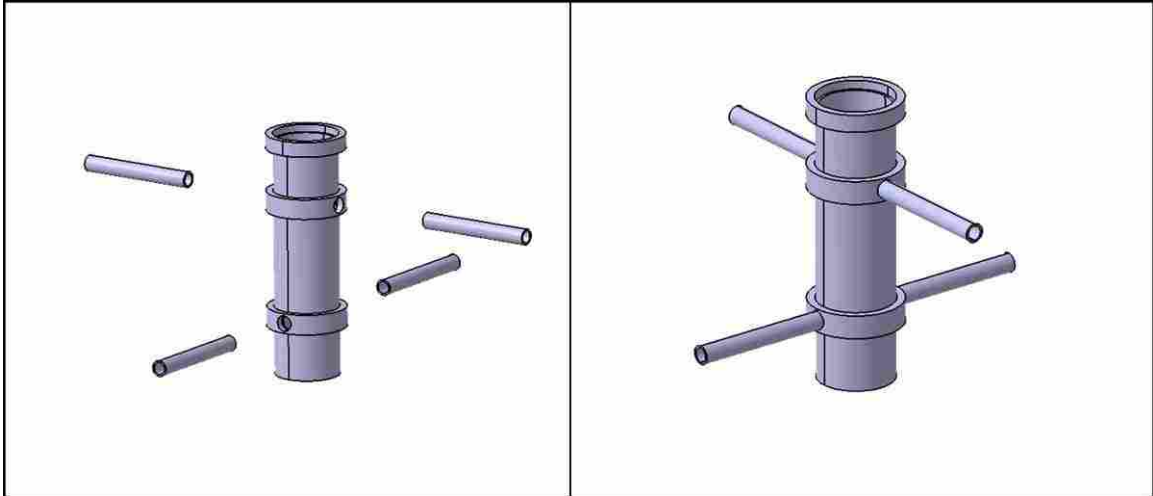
Exploded and assembled views of the main reactor tube with its four access tubes.
